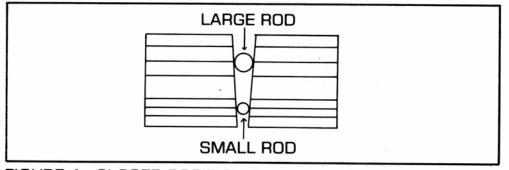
CLOSED POSITION OF WELDING DIES. SPACE BETWEEN WELDING DIES EQUAL TO DIAMETER OF ROD WELDED. (CHECK WITH MOVABLE HEADPIECE IN MAXIMUM UPSET POSITION.)
